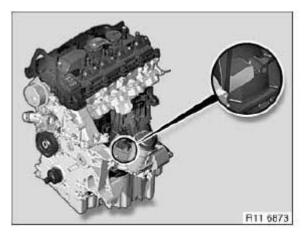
Identifying Engine Identification Label (M47/M47TU/M47T2) Courtesy of BMW OF NORTH AMERICA, INC.
